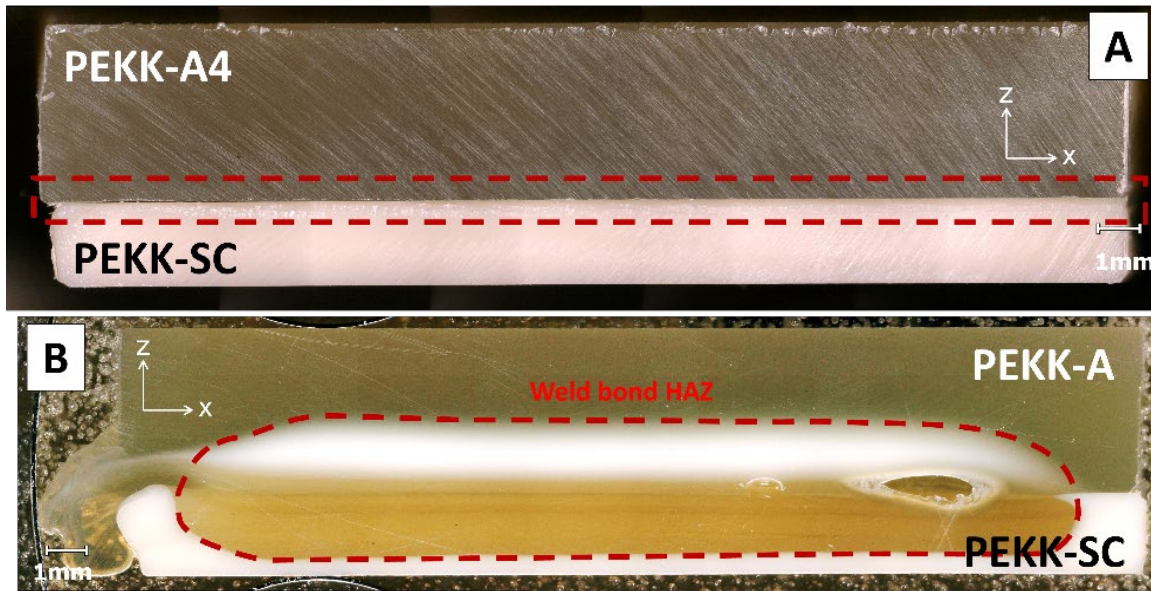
A4/SC-P2 assembly cross-section along the welding path (A) before and (B) after welding.
